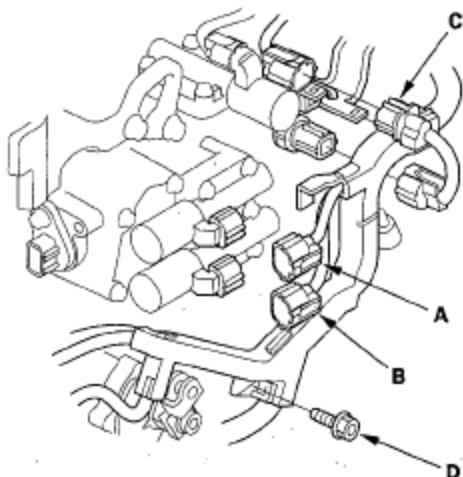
Identifying 4th Clutch Transmission Fluid Pressure Switch Connectors And Harness Cover Mounting Bolt
